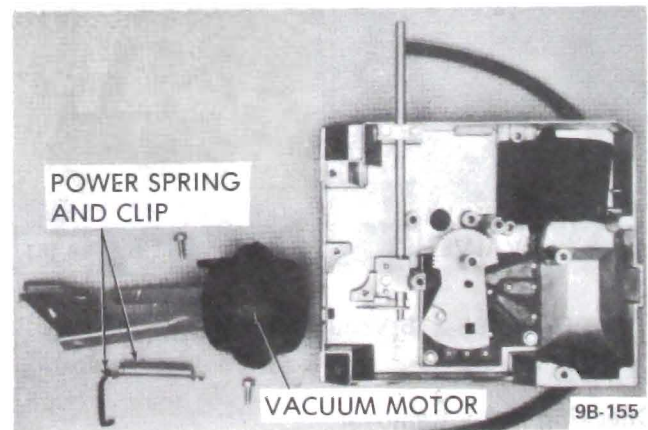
B-240 Vacuum Motor and Power Spring - Removed
